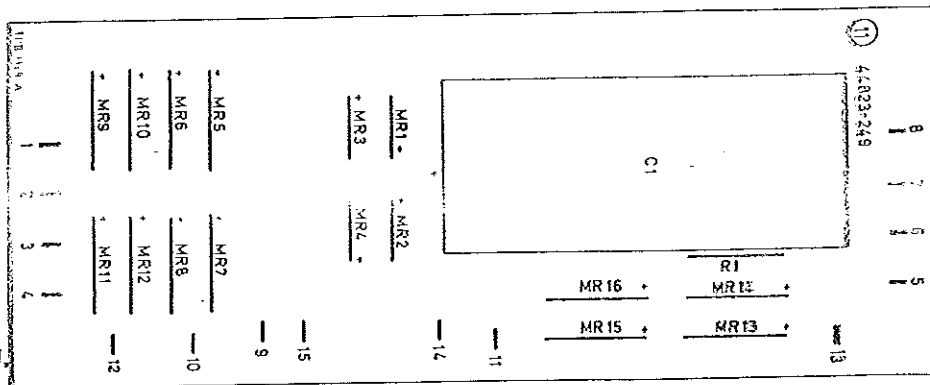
Component location, Board 11, Power supply rectifiers
